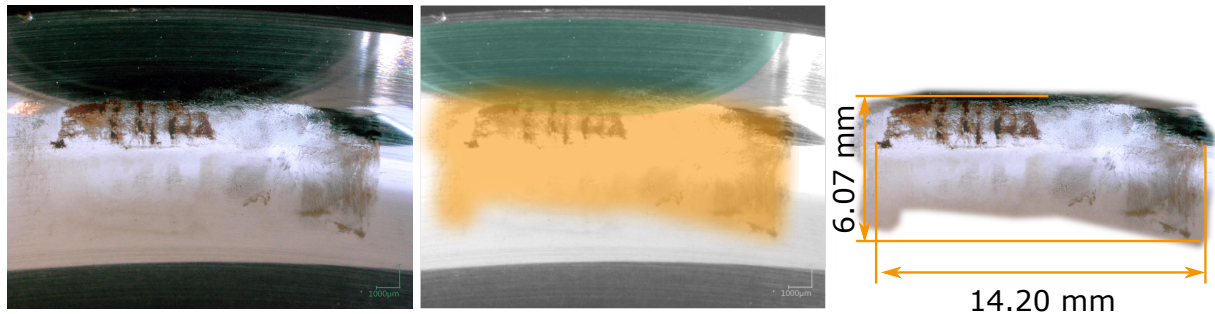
Exemplary raceway condition inner ring, Test ID 3, Bearing ID 0026
